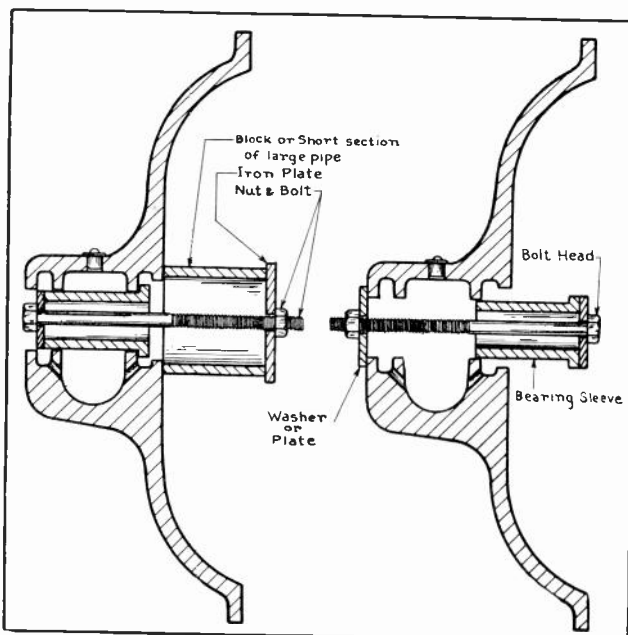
The sketch on the left illustrates a convenient method of removing a sleeve bearing; and on the right is shown the method of replacing the bearing.
